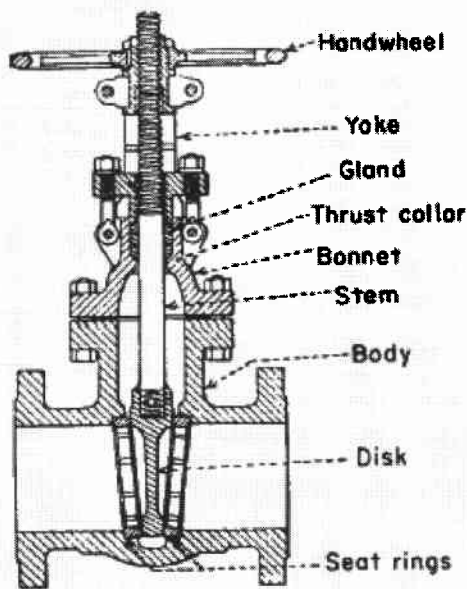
Rising-stem solid-wedge gate valve for 250-psig steam service.
